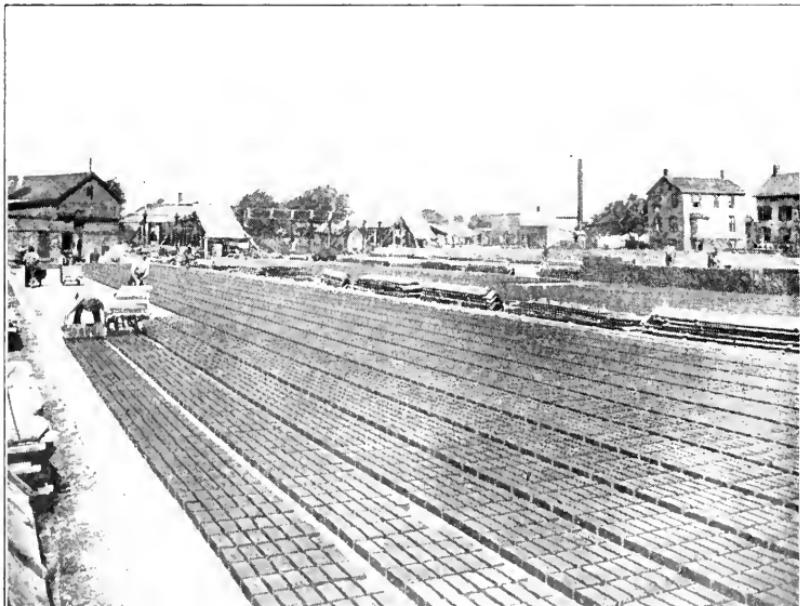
The drying yard of a brick-manufacturing plant at Hackensack
